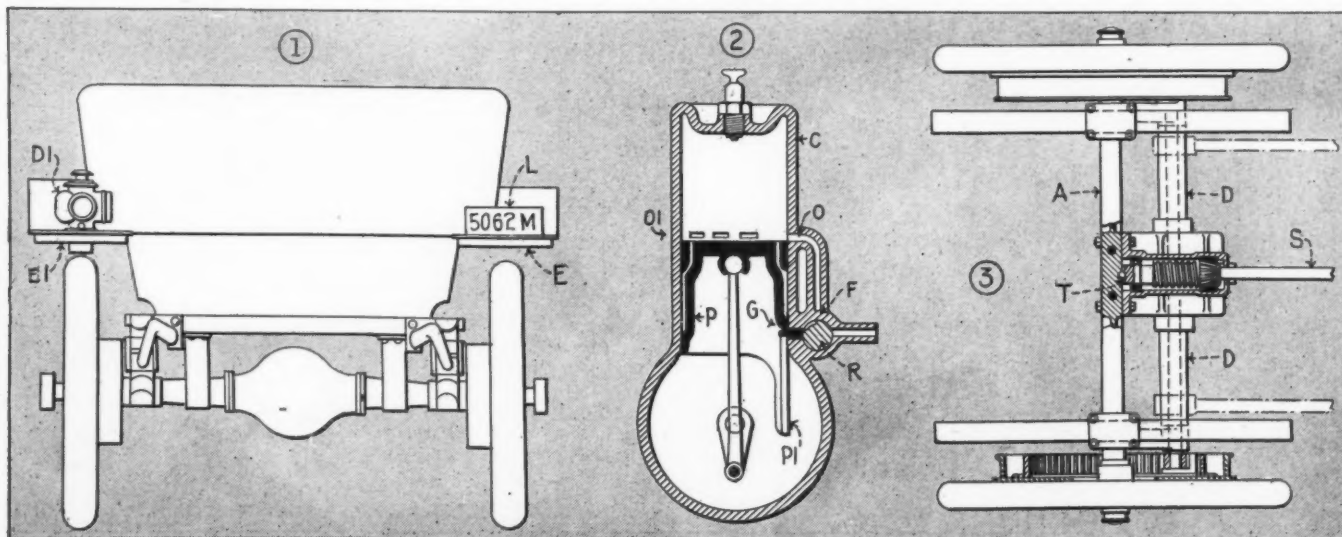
Huff number plate scheme. Fig. 2—Henriod valveless motor. Fig. 3—Axle-drive mechanism
